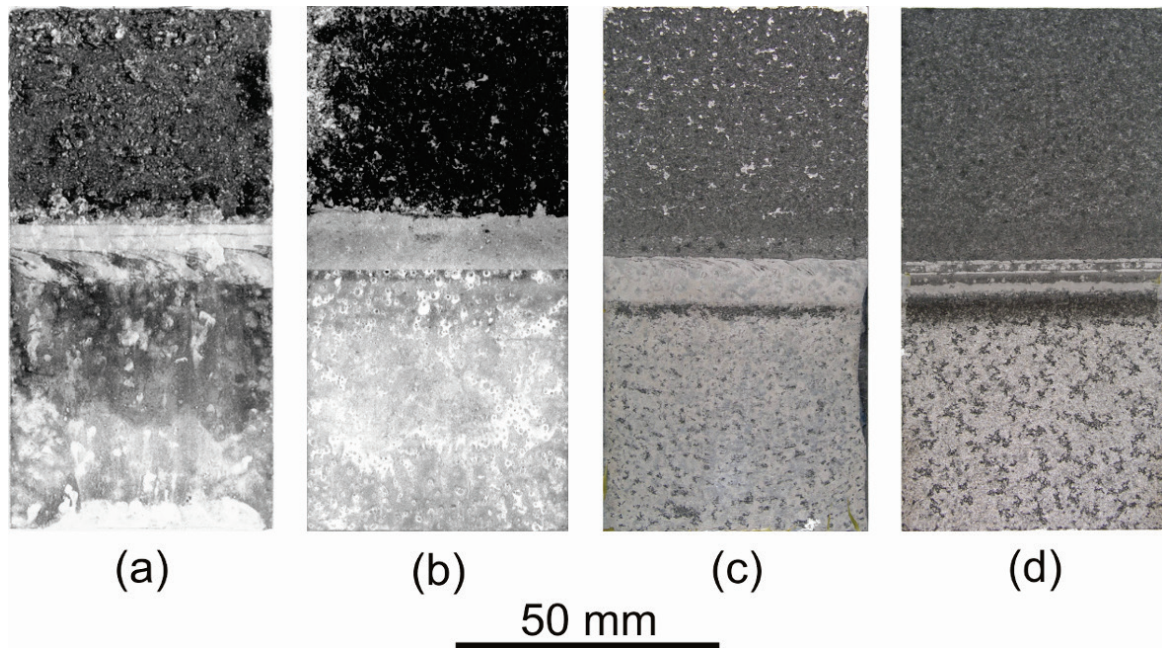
Surface appearance of (a) FSW 2024A-T3/6056-T6 face side, (b) FSW 2024A-T3/6056-T6 root side (c) FSW 2024A-T8/6056-T7X face side, (d) FSW 2024A-T8/6056-T7X root side joints after 96 hours immersion in the EXCO solution test. The 2024A part is positioned at the lower side of the panels
